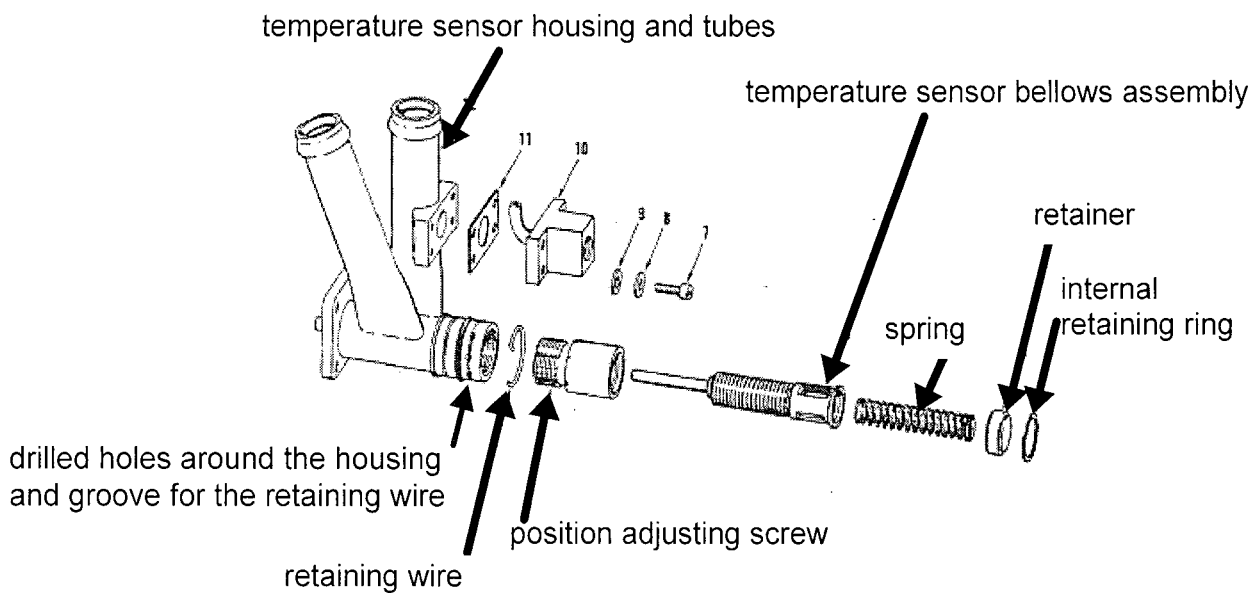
Diagram of the aspirator assembly showing greater detail than shown in figure 1.
